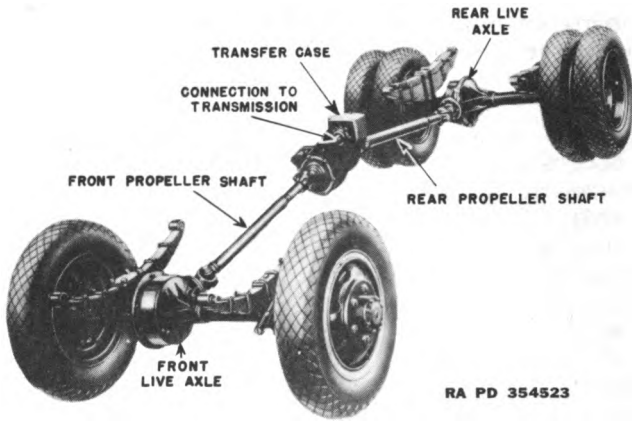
Arrangement of Transfer Assembly, Propeller Shafts, Universal Joints, and Live Axles for Four-wheel Drive.
